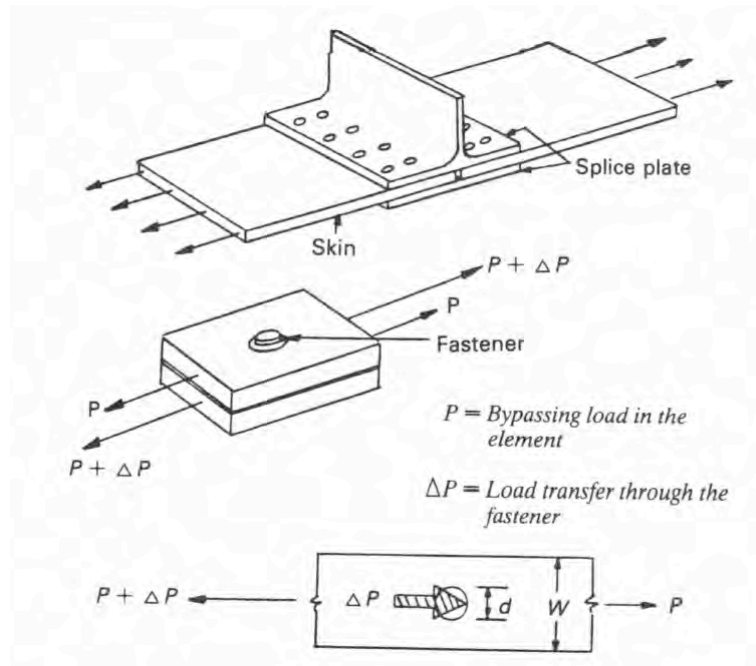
Load Fastener, Load Transfer, and Bypass Load [13]
